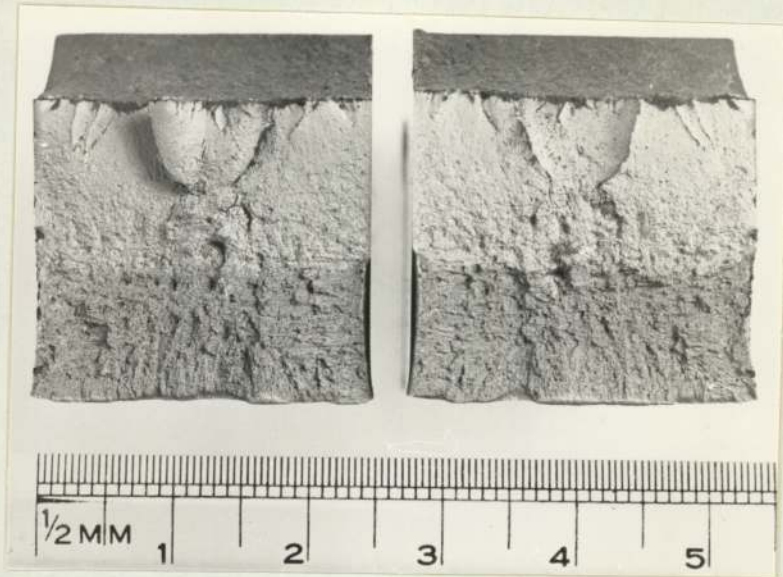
Material F Cast Specimen Fracture Surface.
